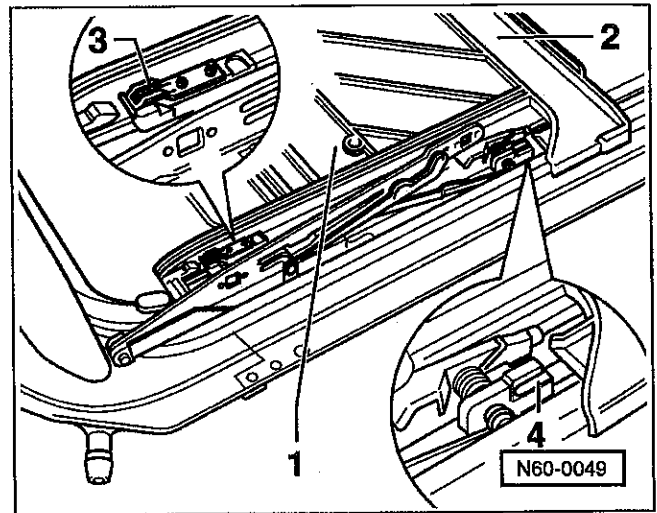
Slide headliner (1) and trim frame (2) to rear. Insets show trim frame clip (3) and trim frame guide (4).
